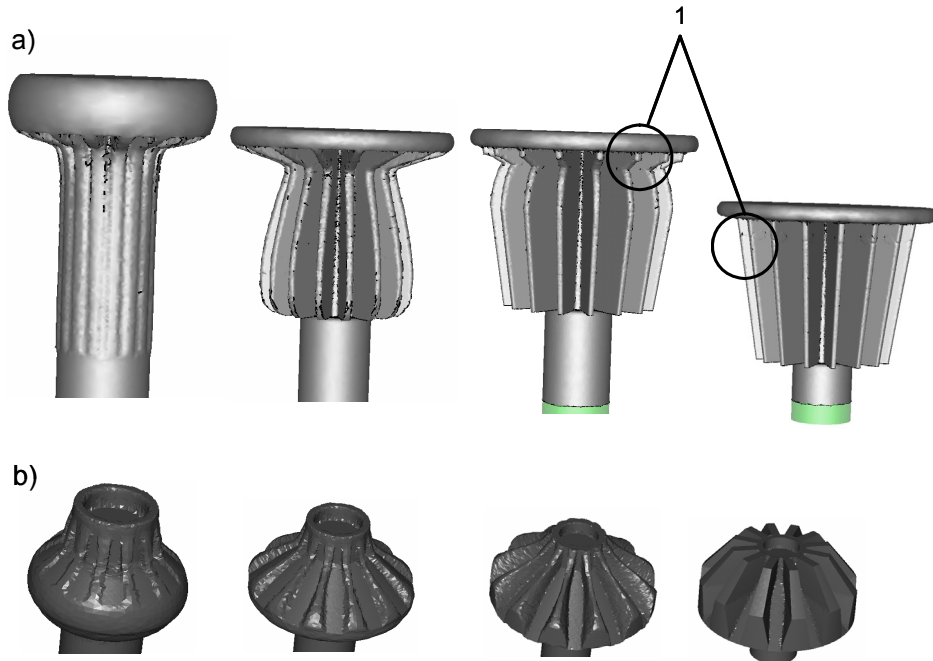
Modelling of the process of gear forging: a) in the slidable die. 1 – formation of lapping defects; b) modelling of the process of gear forging in the inverted die
